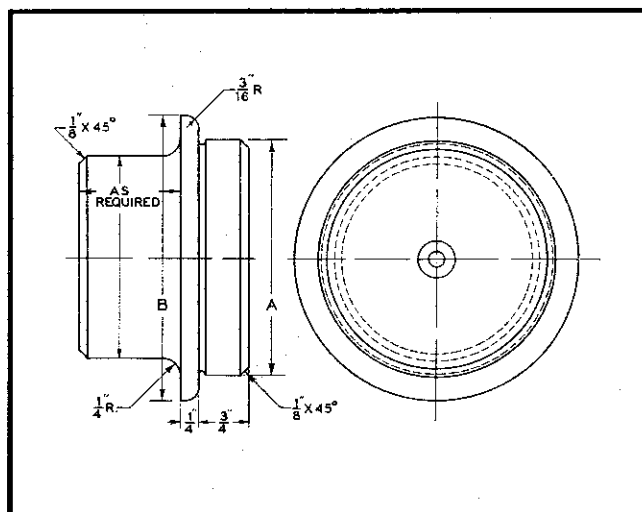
Cylinder Phenolic Liner Inserting Tool
